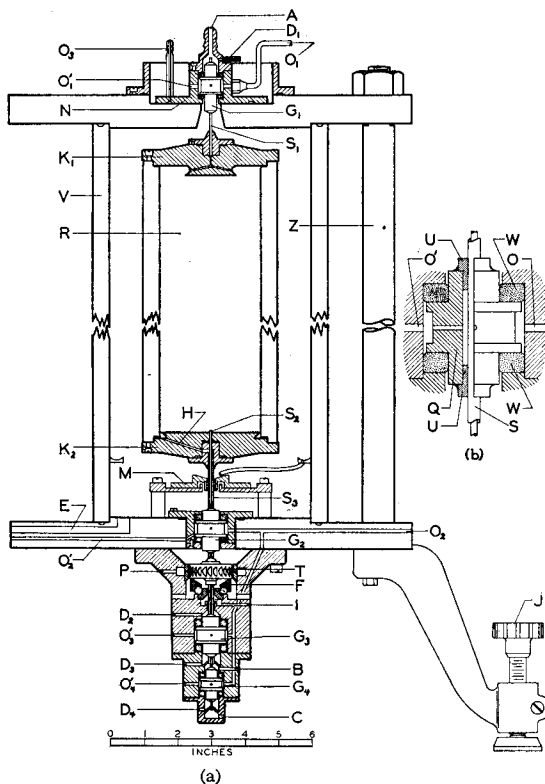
(a). Drawing of tubular vacuum-type centrifuge used to centrifuge gases and vapors. (b) Enlarged drawing of vacuum-tight oil gland.
